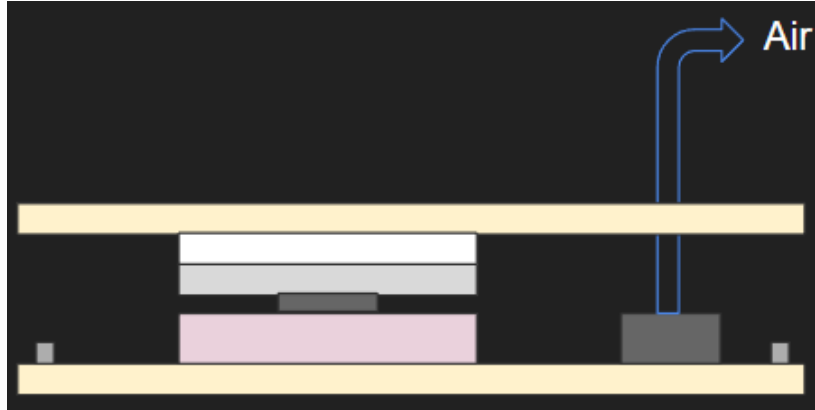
Side view of vacuum bag apparatus. Note these dimensions are not to scale.
